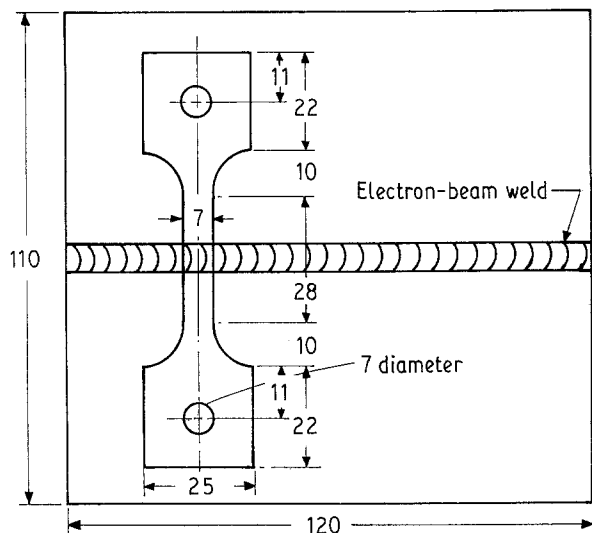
Transverse tensile weld specimen geometry and location of the weld bead with respect to the tensile stress axis.
